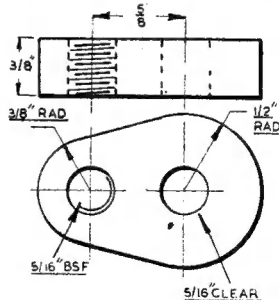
The foot-piece for attaching the jockey pulley arm to the headstock casting
